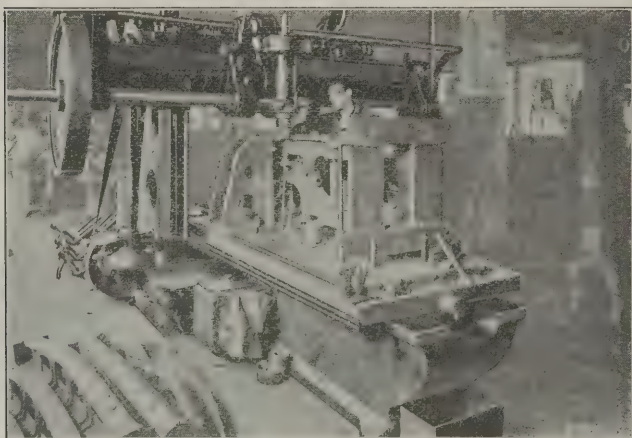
Milling the Seats and Recesses on a Nailing Machine Column
